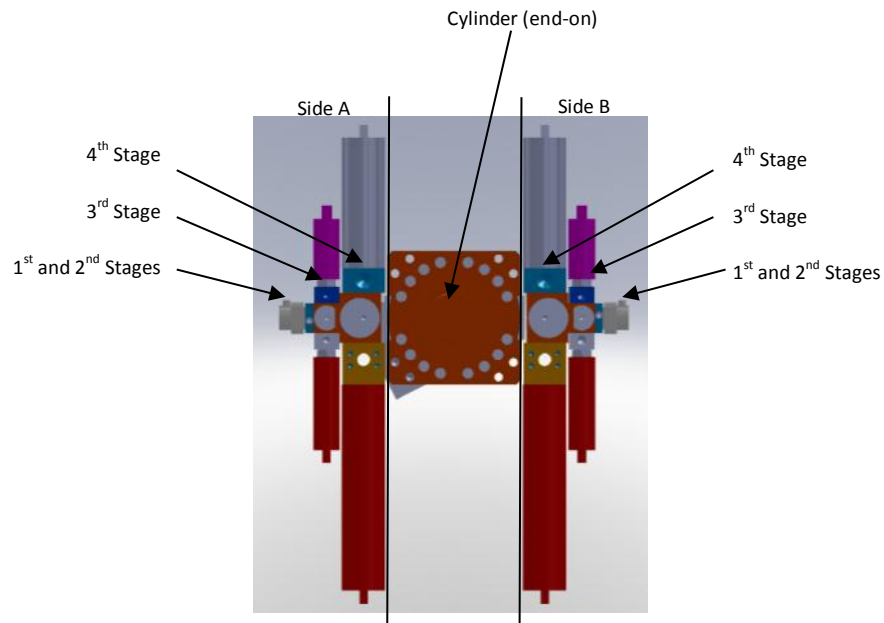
LF60 4 stage in-plane Valves arrangement: front view
